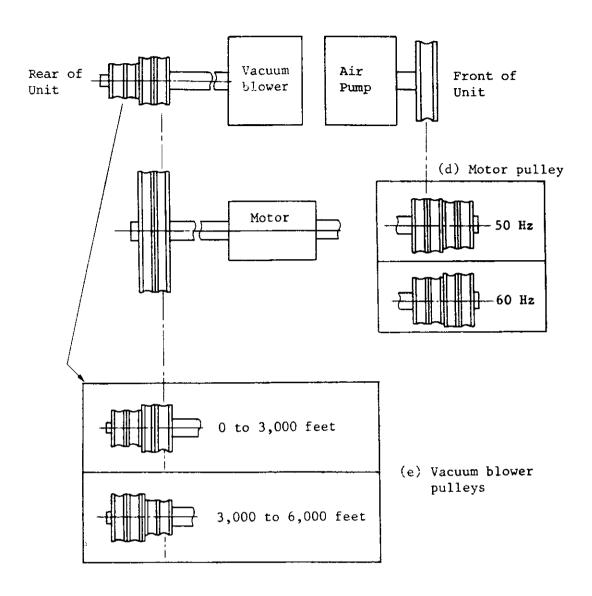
Air supply unit: vacuum blower and motor pulleys (2)
